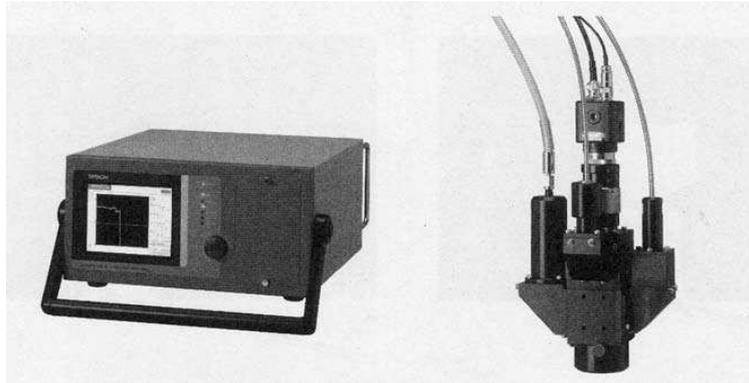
Laser welding monitor (main part) [MML-100A] and exit unit for MML-100A.
